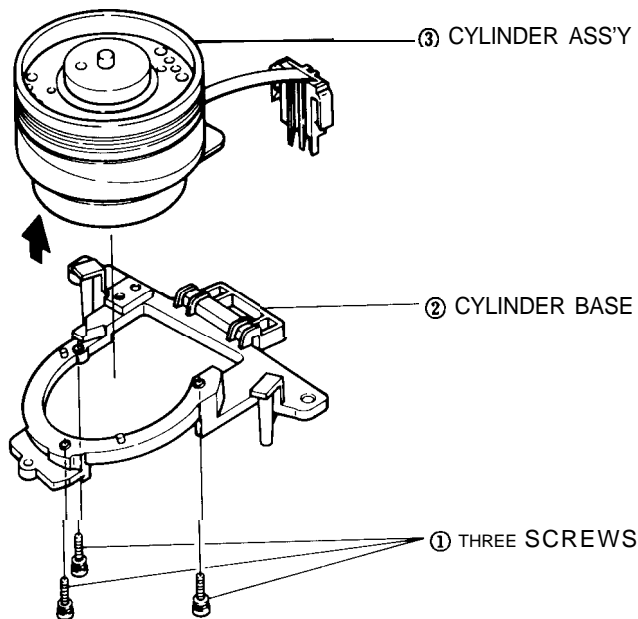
Cylinder Ass'y Removal from Cylinder Base
